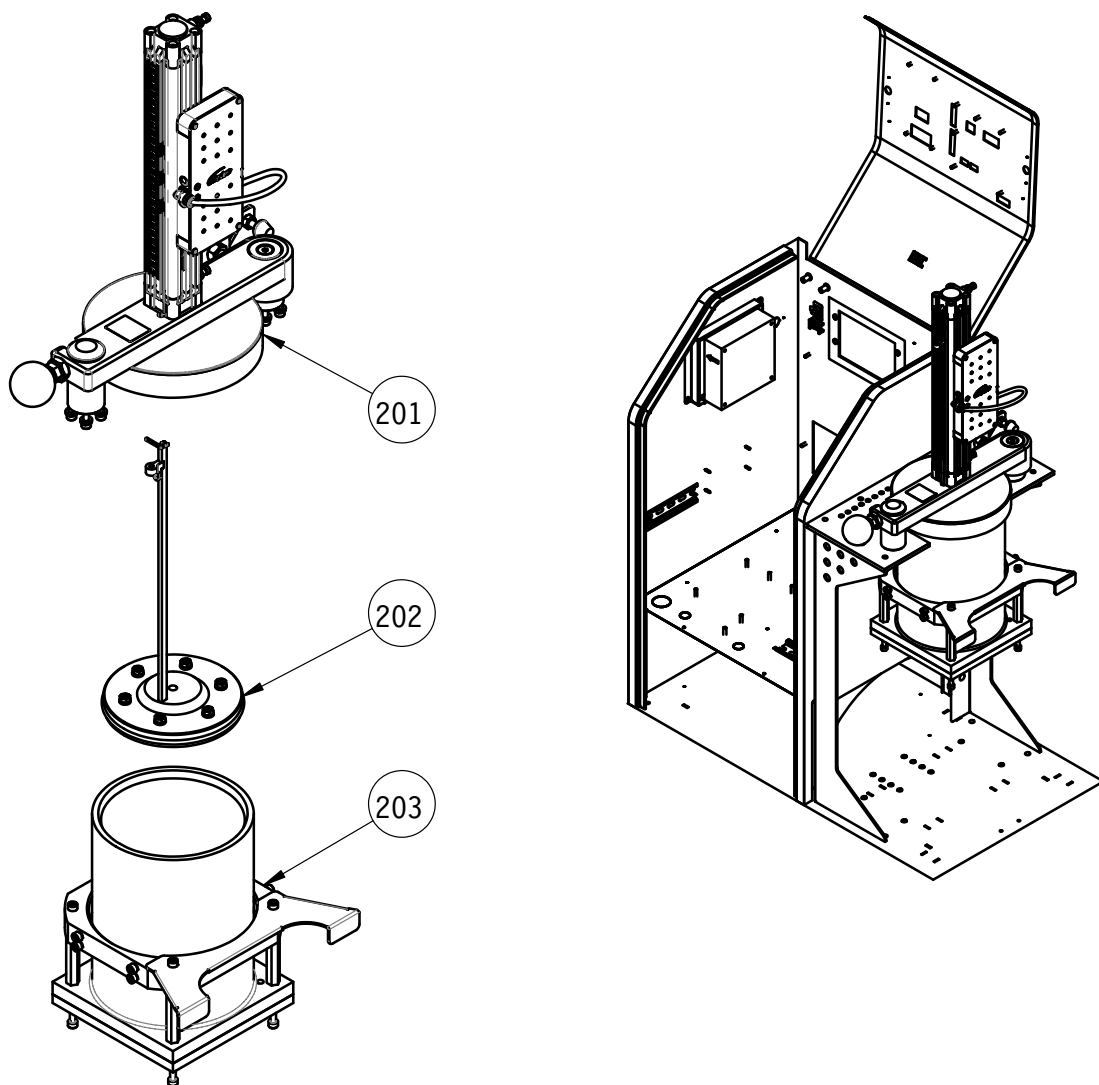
Pivot lid/plunger 154/hopper (154) assembly parts
